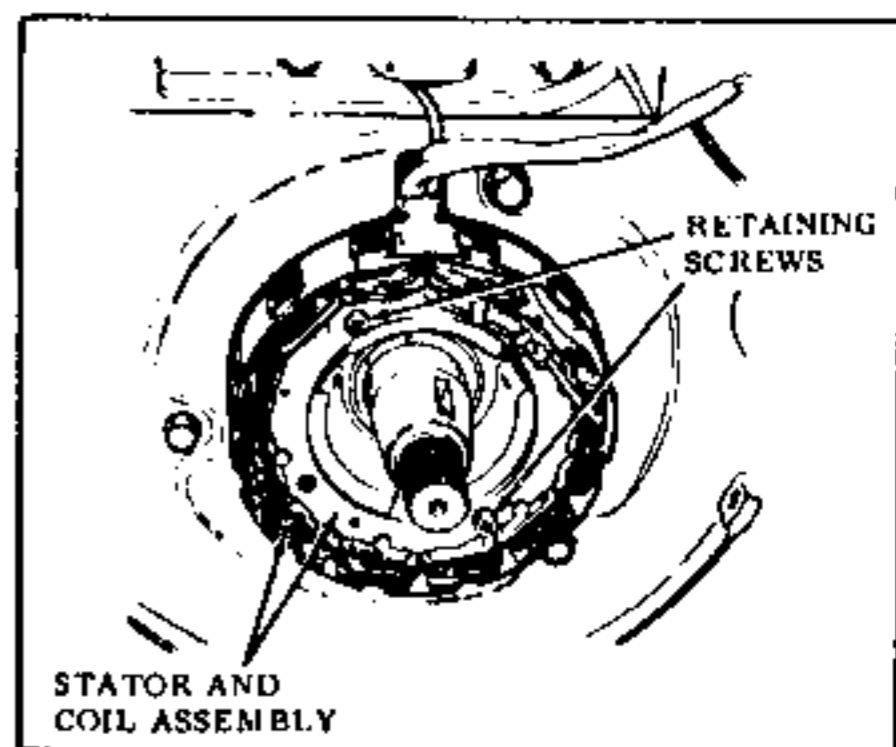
Ignition generator coil and stator serviced only as an assembly.
